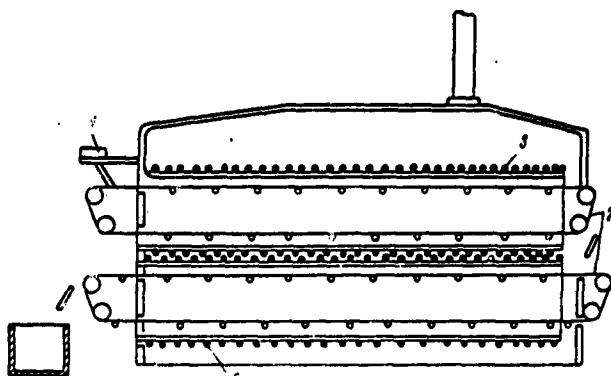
Machine for varnishing plates with induction heating. 1) Varnishing machine; 2) conveyor; 3) steel boxes with windings.
